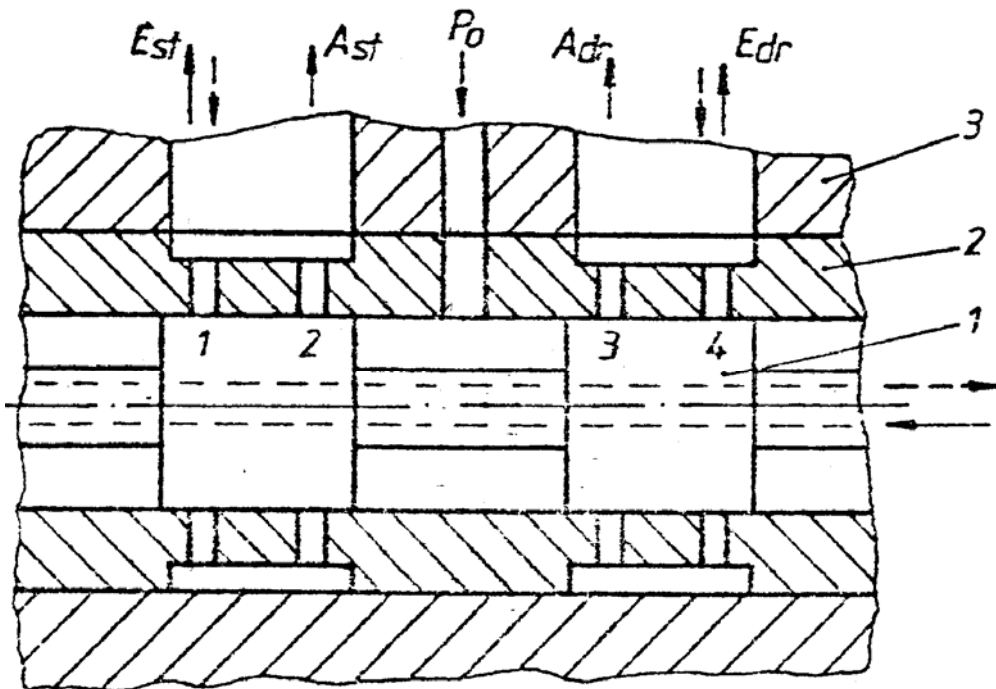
Detail of the device in Fig. 1: 1 – straight edges; 2 – sleeve; 3 – device body
